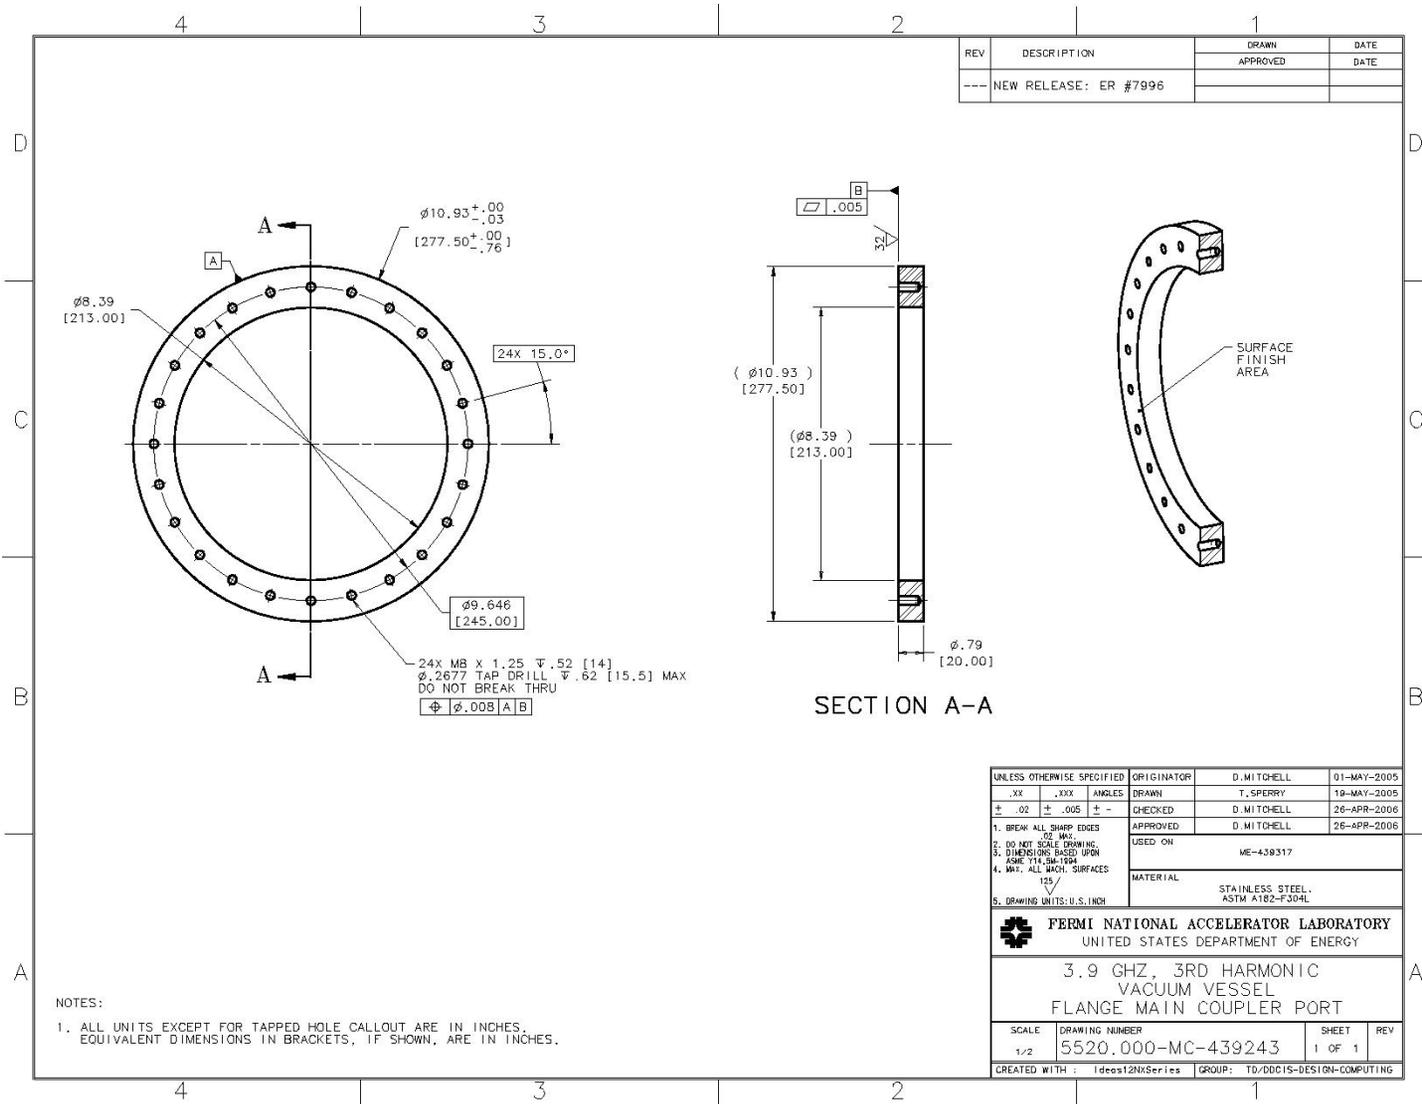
Drawing of Flange for the Main Coupler Port (5520.000-MC-439243)
